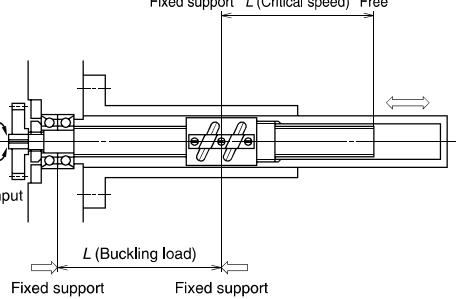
Supporting conditions for screw shaft and ball nut
